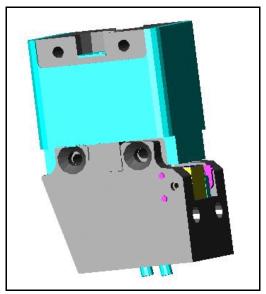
Lower Flex Joint assembled to Pelvis/Lumbar Mounting Block
